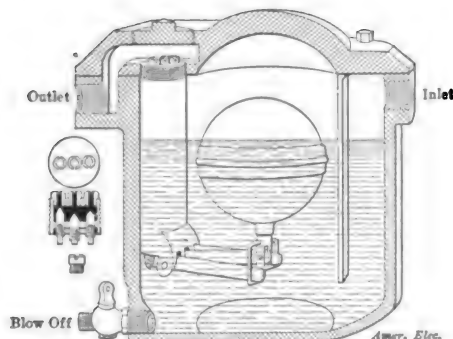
WRIGHT "EMERGENCY" STEAM TRAP.
